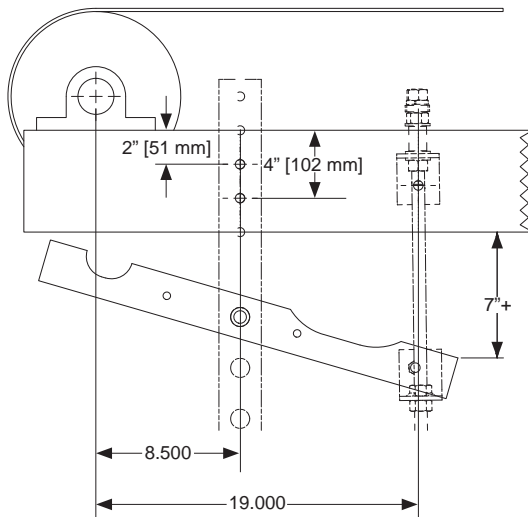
SBR configured with the motor mounted beneath the frame and the brush bearings mounted to the outside of the side frame
